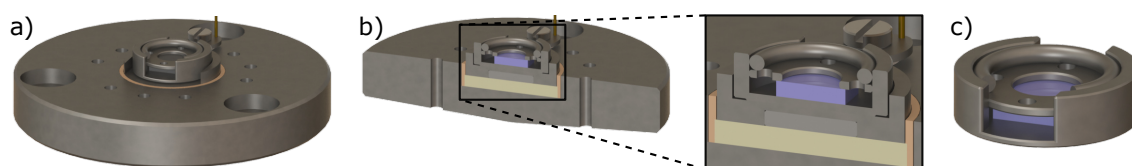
(a) Sample holder exchange system of version 2 outer STM with magnetically attached sample holder, and (b) sectional view with blue highlighted sample. (c) Sample holder with blue highlighted sample
